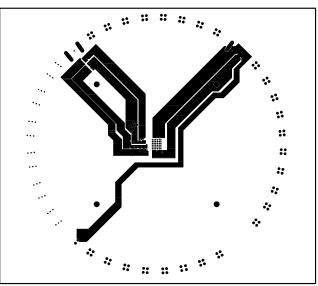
MAX105 EV Kit PC Board Layout—Inner Layer, Power Plane
